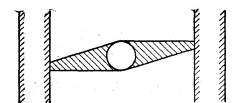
DIAGRAM OF BUTTERFLY VALVE
